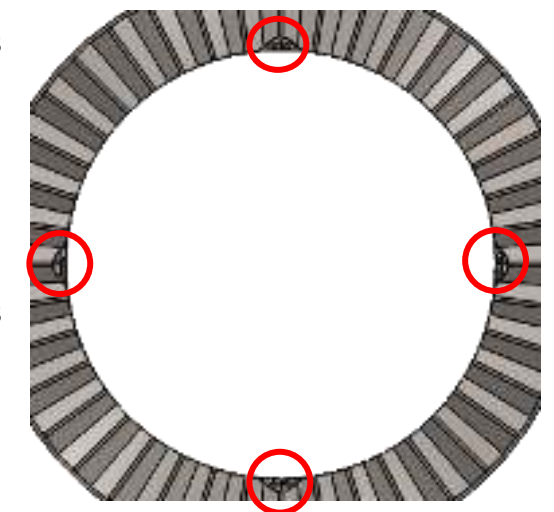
bottom view of neutraliser grids with nozzle cutouts circled in red
